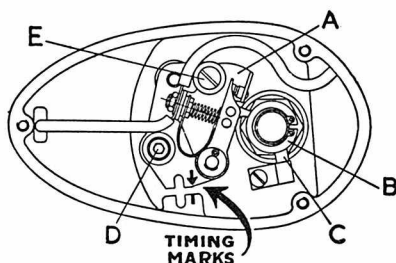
View of breaker point installation on models 2L, 9E and 31C.
